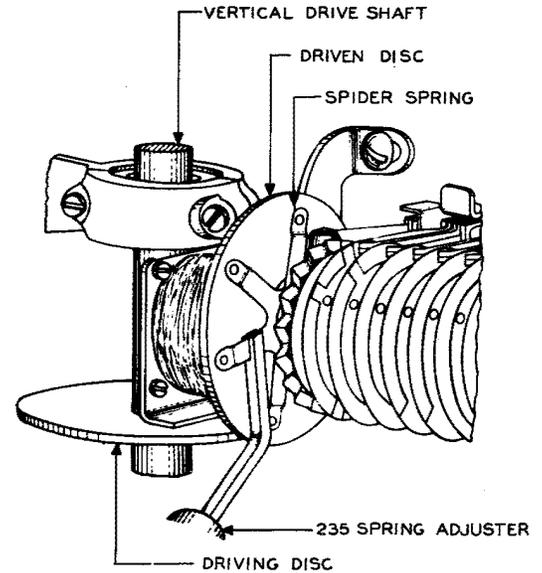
Method of Using the 235 Spring Adjuster to Adjust the Spider Spring
